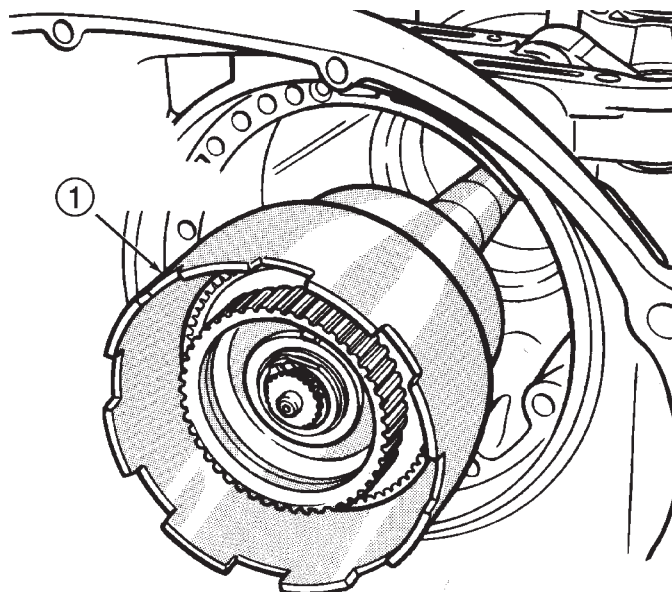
Installing Low-Reverse Drum Retaining Snap-Ring
